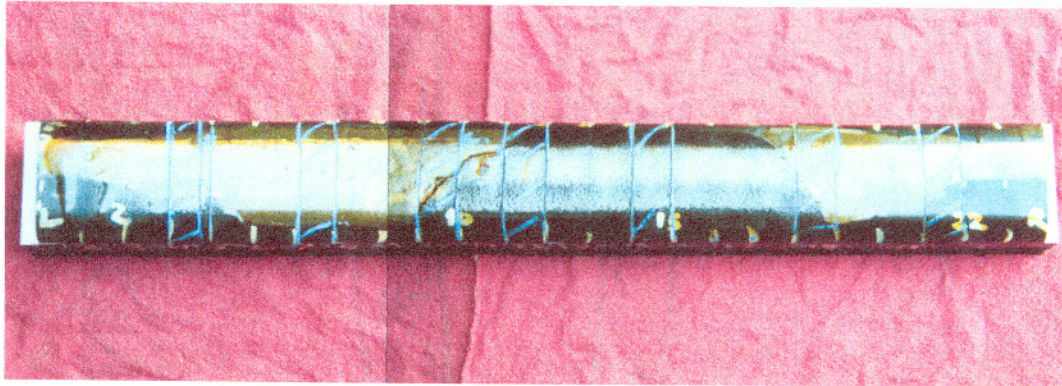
Sectioning of track lab coupon, TL2.
